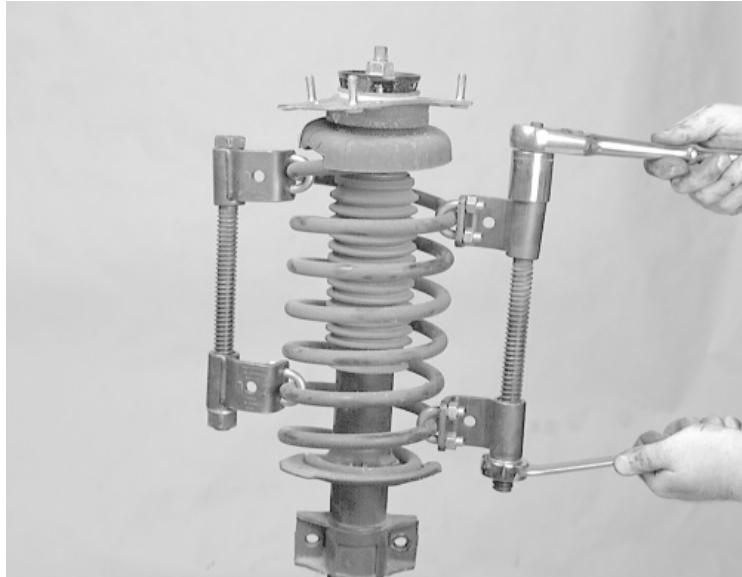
Install the strut spring compressor tool onto the spring
